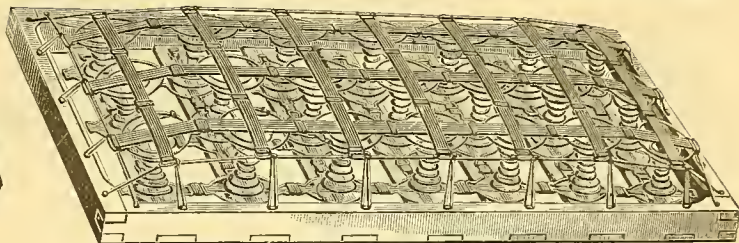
BUSHNELL CUSHION-FRAME AND SPIRAL SEAT-SPRINGS.
